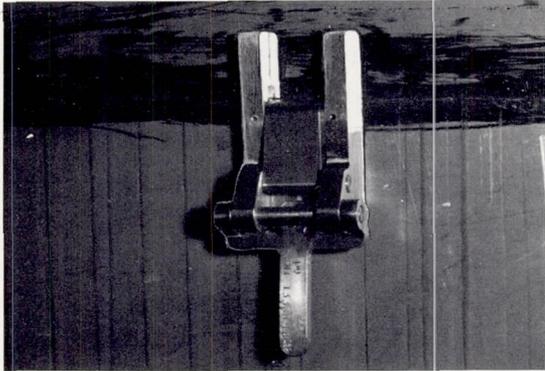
Retainer components in place on the weld side of a tank.
